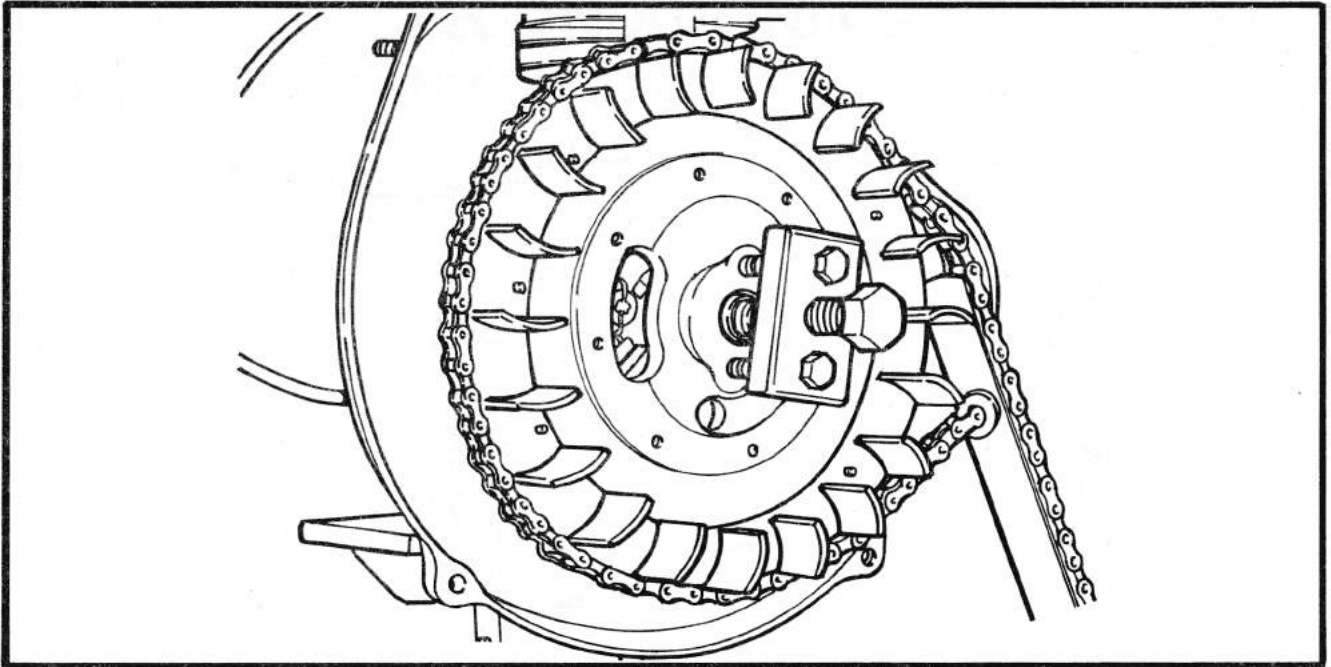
USE PULLER TO REMOVE FLYWHEEL
